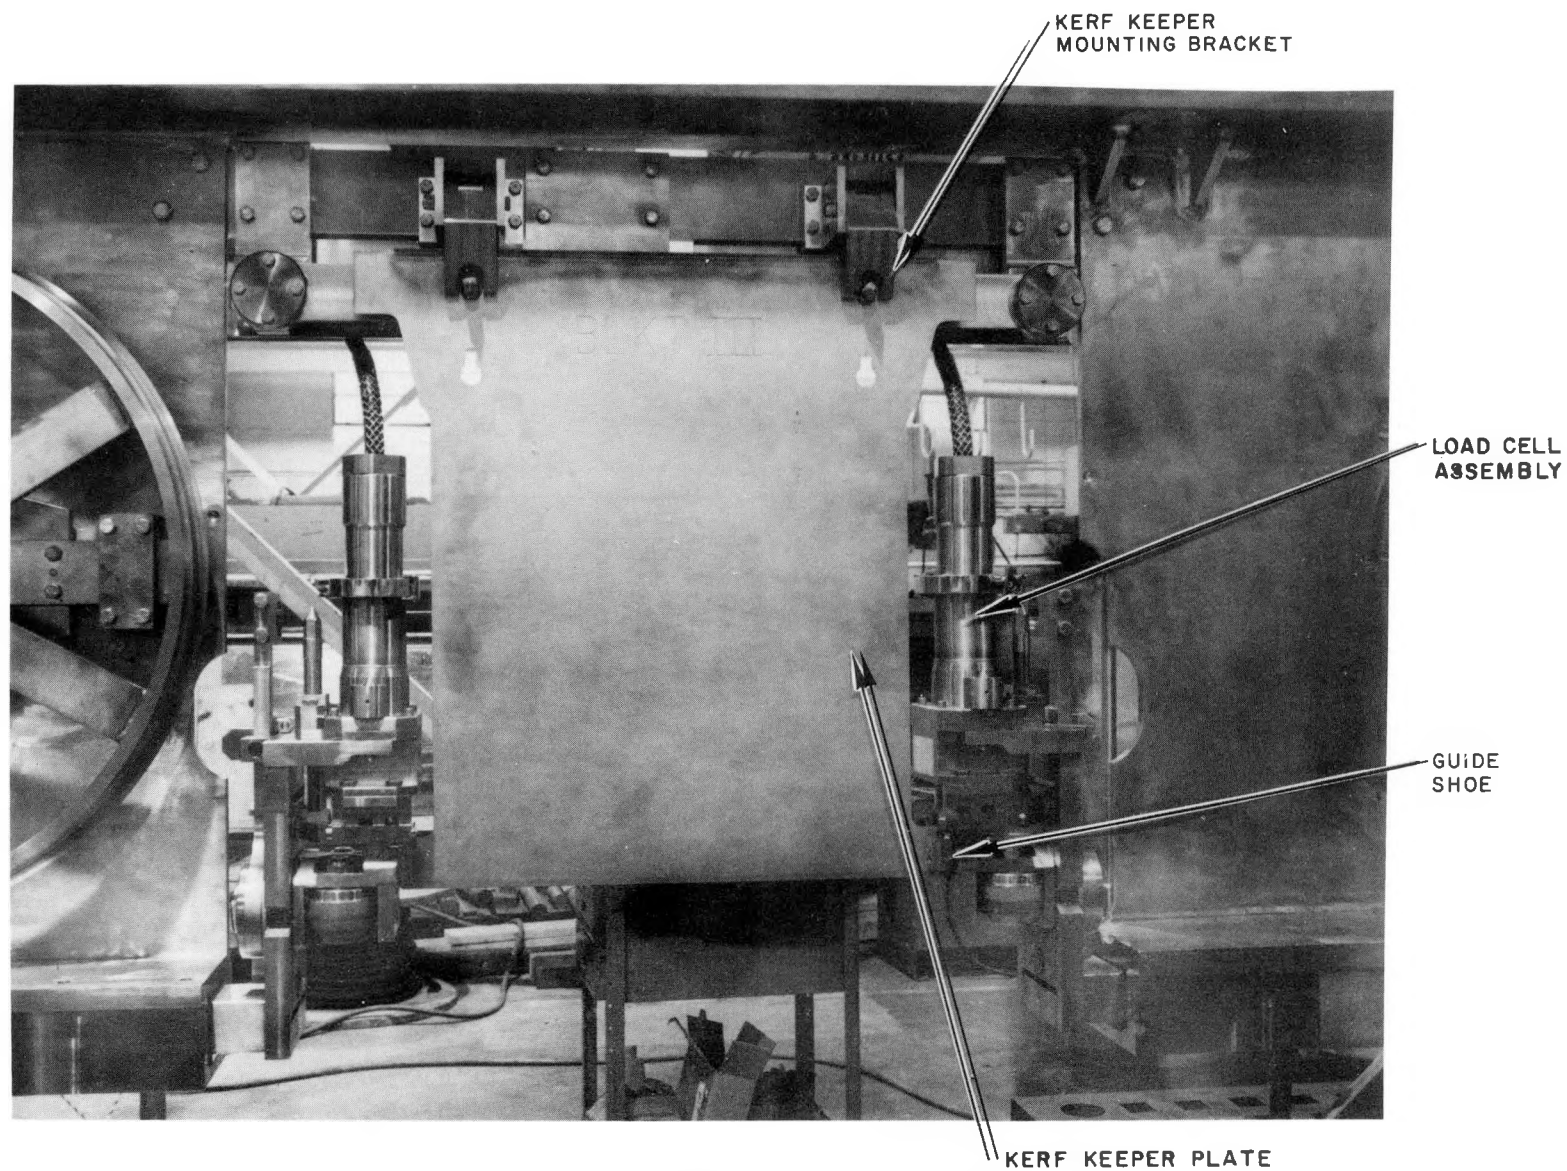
MDA-COS With Blanket III Kerf Keeper Plate Installed
